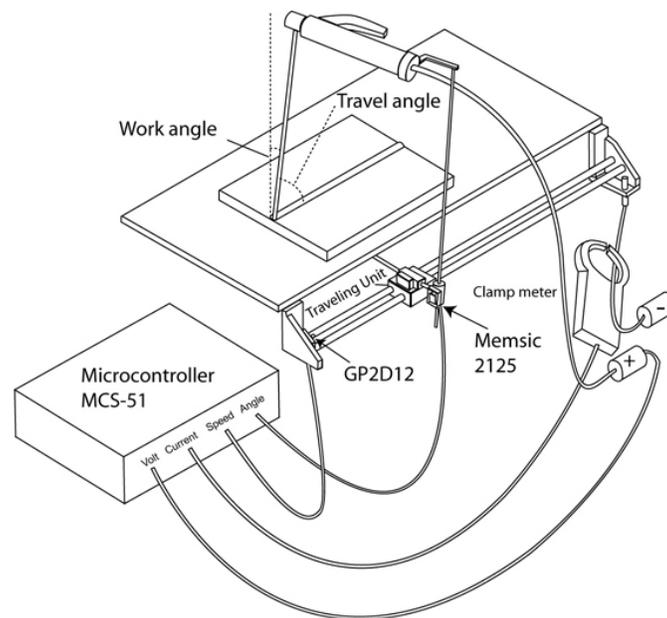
Data Logger for Capturing the Four Welding Parameters Showing Bead-on-Plate Welding Position
